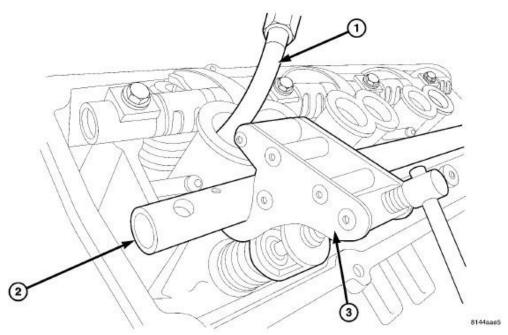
SPECIAL TOOL 9065A COMPONENTS Courtesy of CHRYSLER LLC
